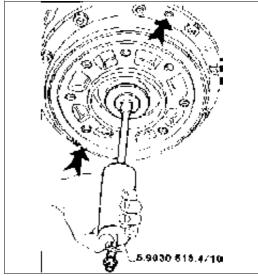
Removing the hub flange with SAT no. 5.9030.618.4/10 tool.
